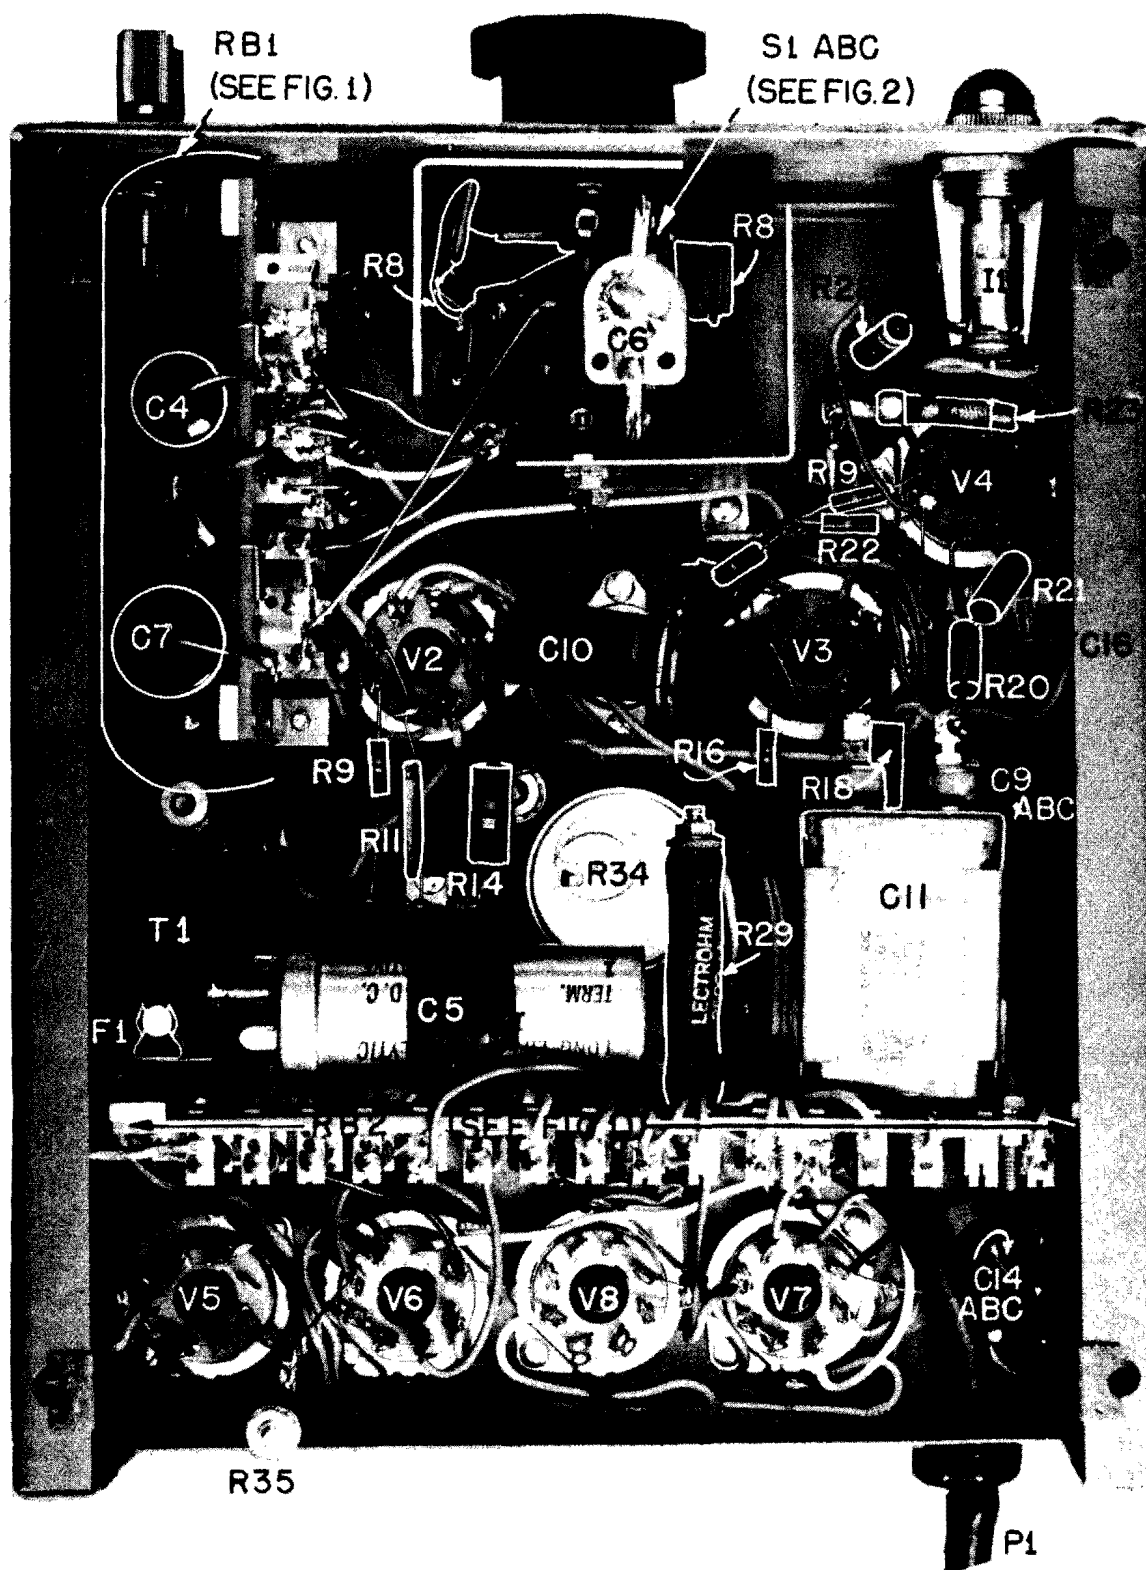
Model 400A Bottom View Bottom Plate Removed
